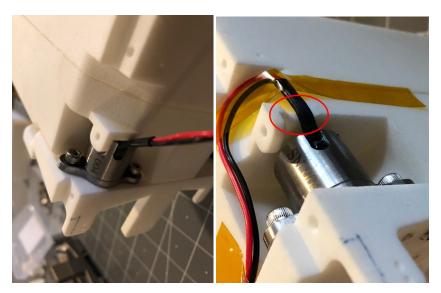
Valve Wire Fit-up Issue and the Proposed Solution
